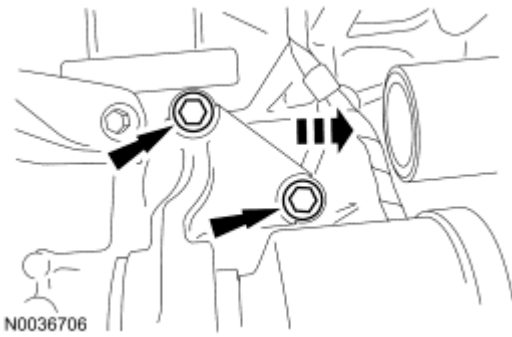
Locating Half Shaft Carrier Bracket Bolts And Sliding RH Halfshaft Out Of Transaxle
